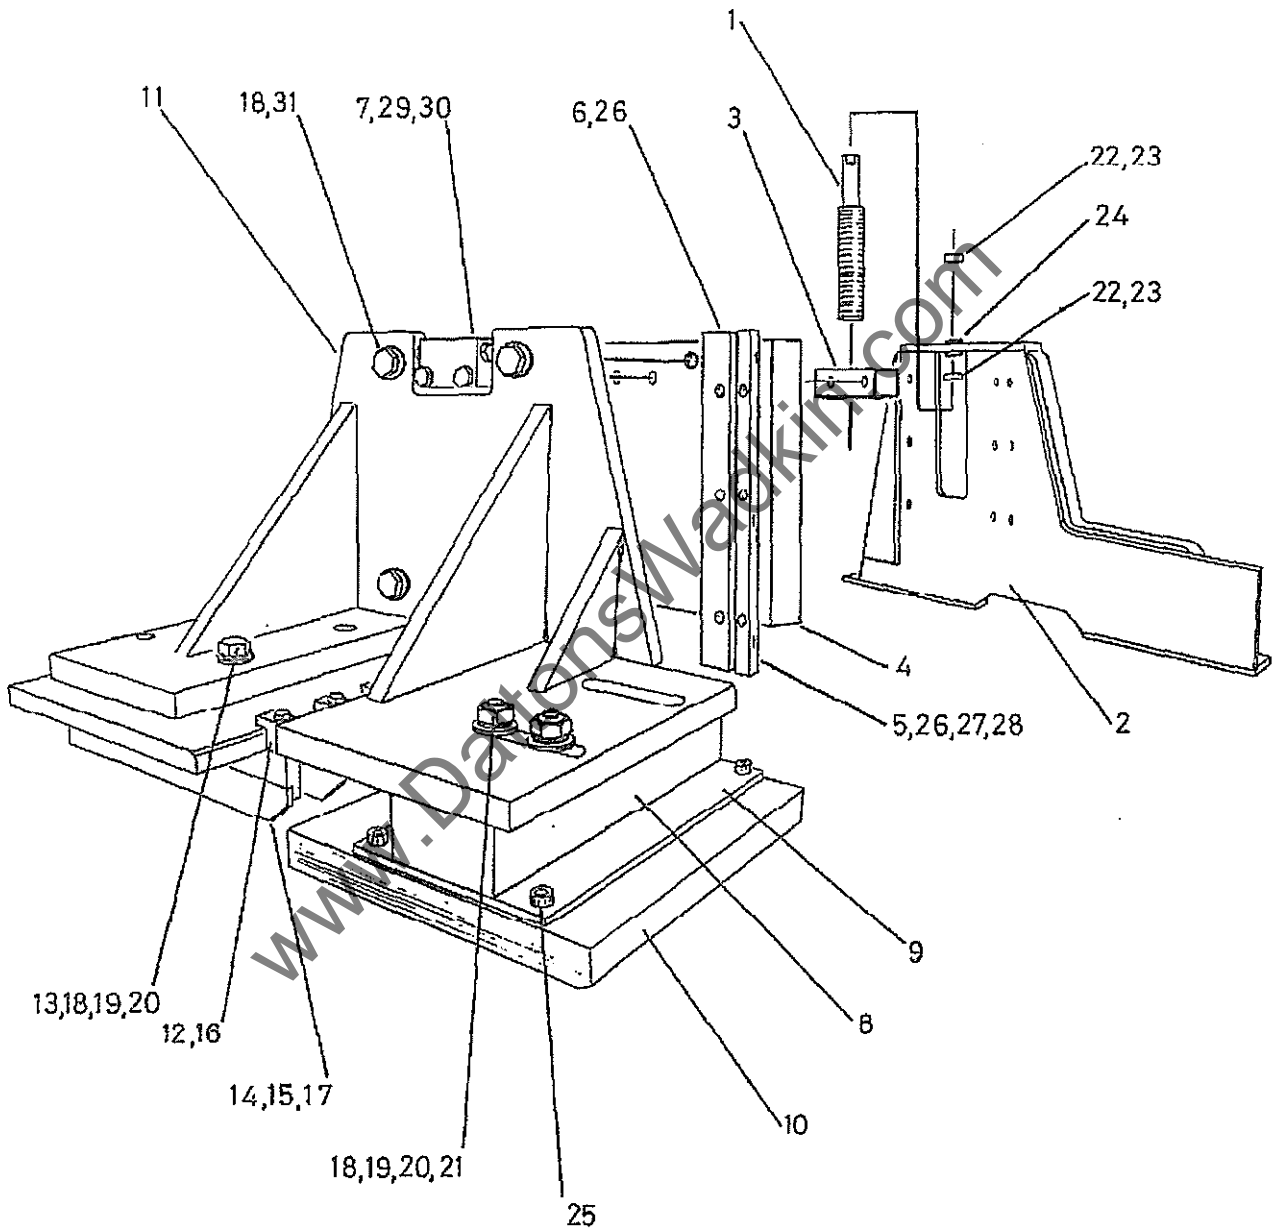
TOP PAD PRESSURE AND RIVING KNIVES
